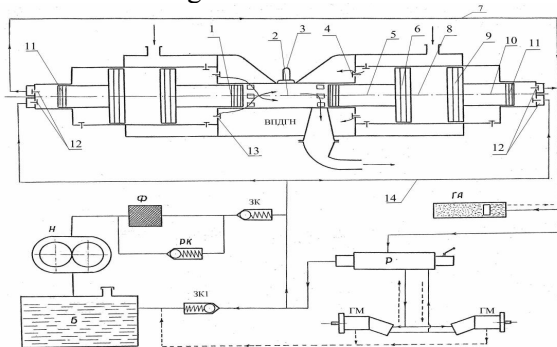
Free-piston inner combustion engine (FPICE) with hydraulic power transmission:
